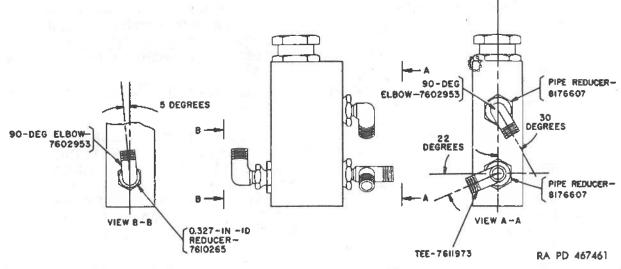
Positioning of tee and 90° elbows in valve body 8011581.
